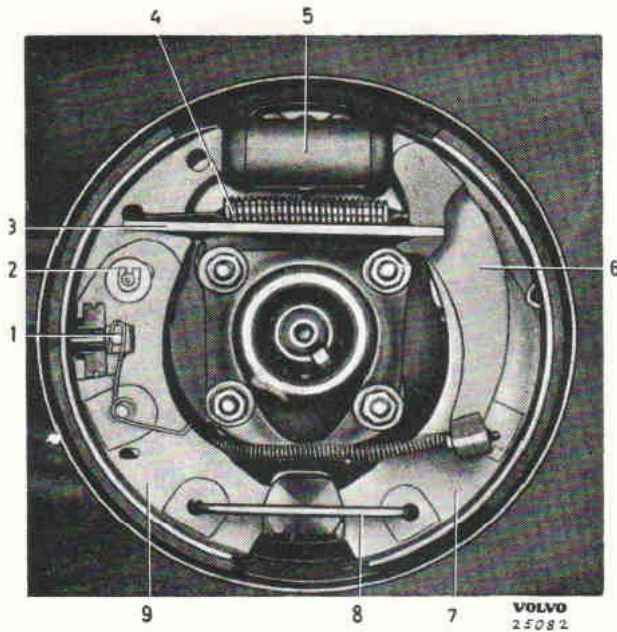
Wheel brake unit, early production, left-hand rear wheel.
